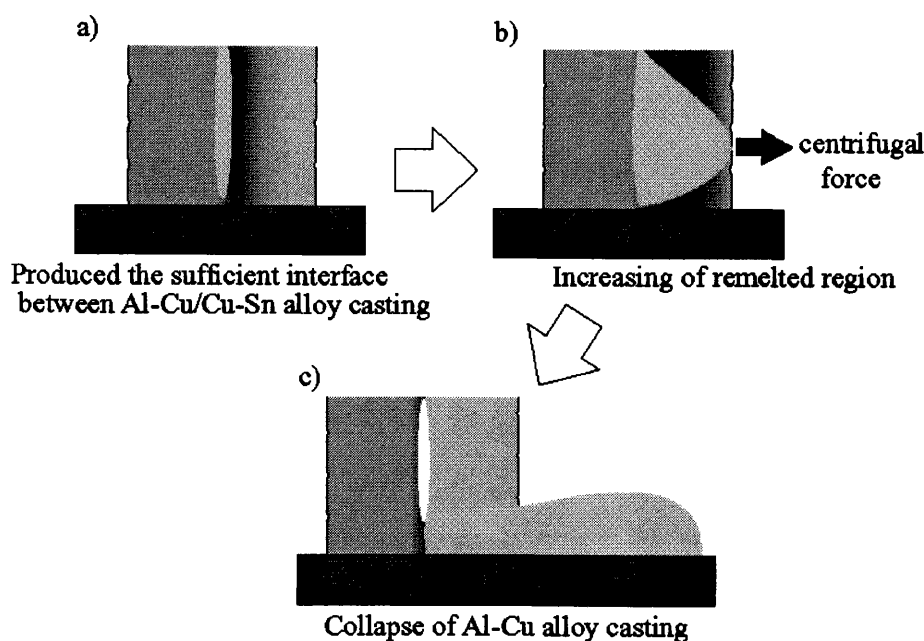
Schematic drawing of collapse process of Al-Cu alloy casting.
